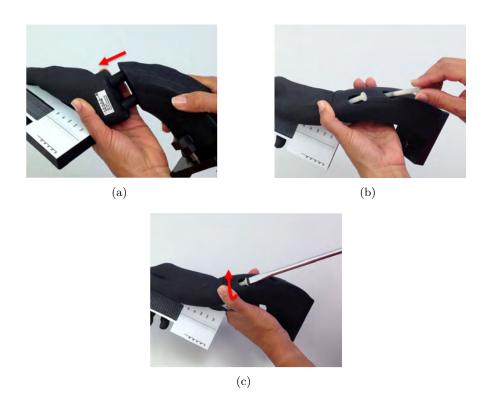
(a) Inserting the pegs into the hand's wrist, (b) placing the screws (for V2 hands only), and (c) tightening them.
